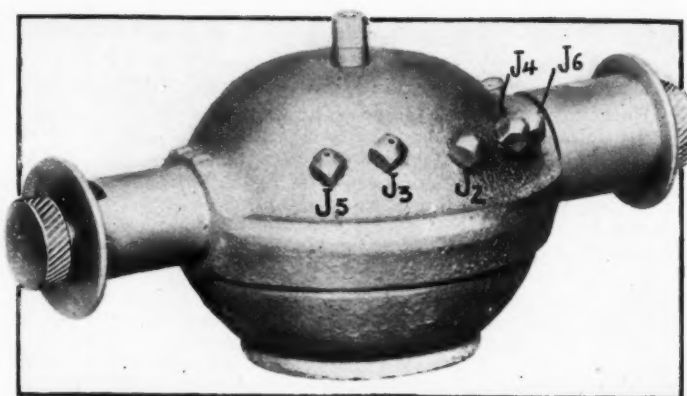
Float chamber of the A. B. C. automatic carburetor
